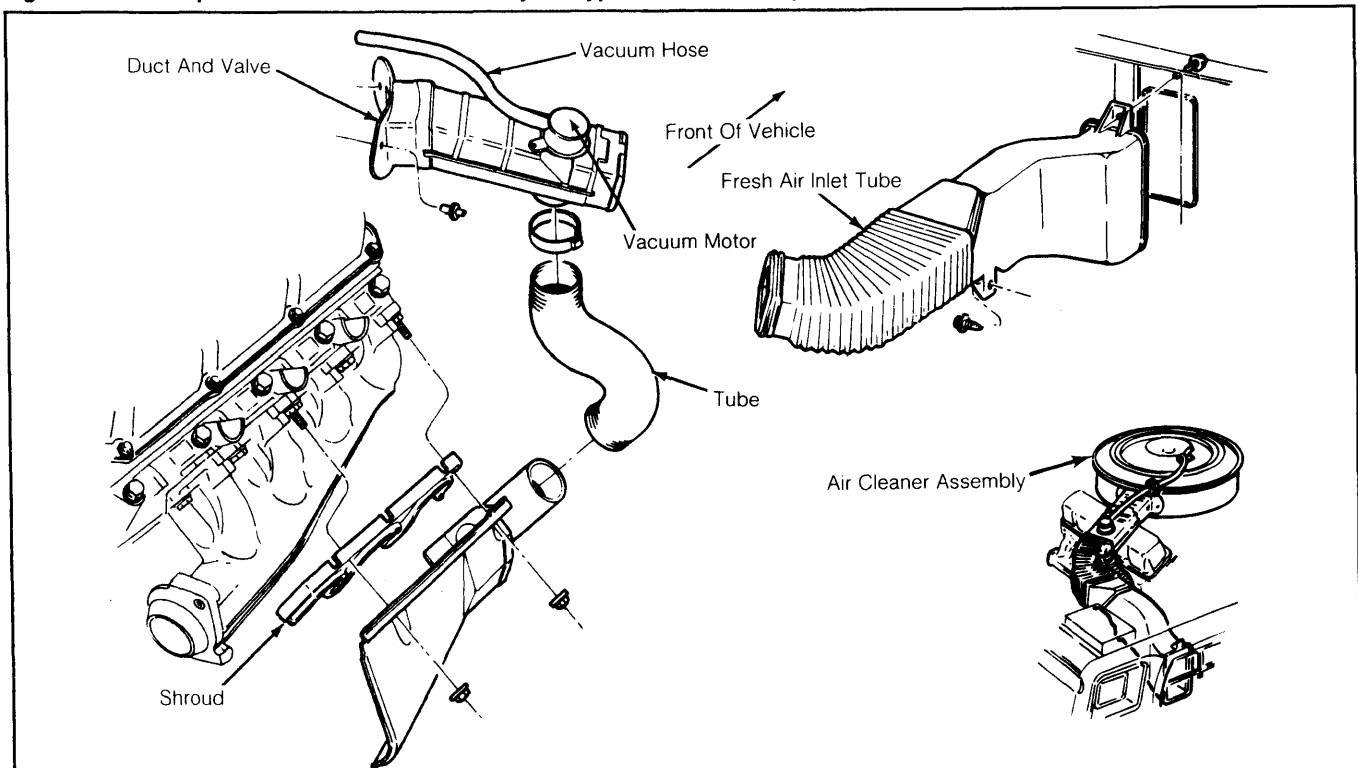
Vacuum-Operated Air Cleaner Assembly — Typical V8 Assembly Shown (Others Similar)
